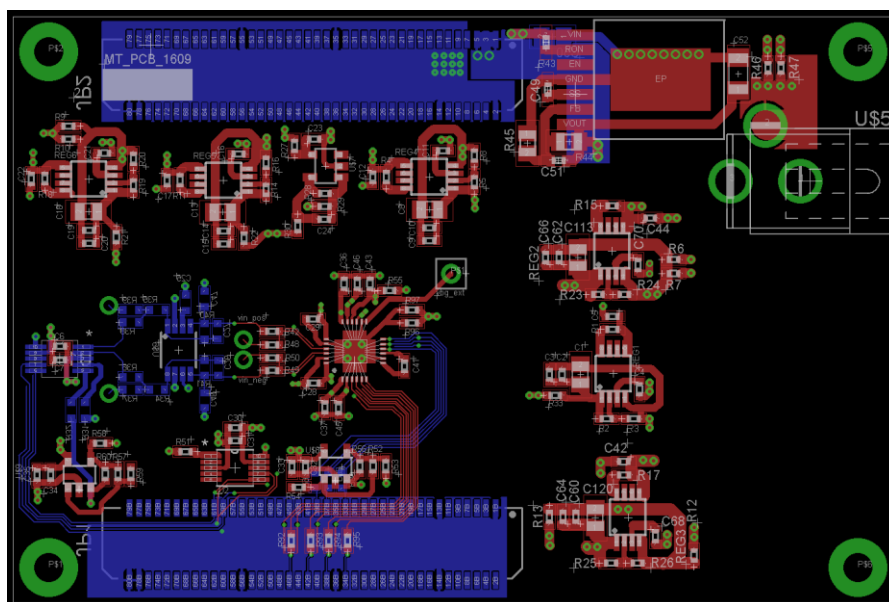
Layout of the designed proximity card. It includes voltage regulators, DACs, buffers, and connectors for the FPGA and power. The top and bottom view of the PCB is shown in order to see the component placement.
